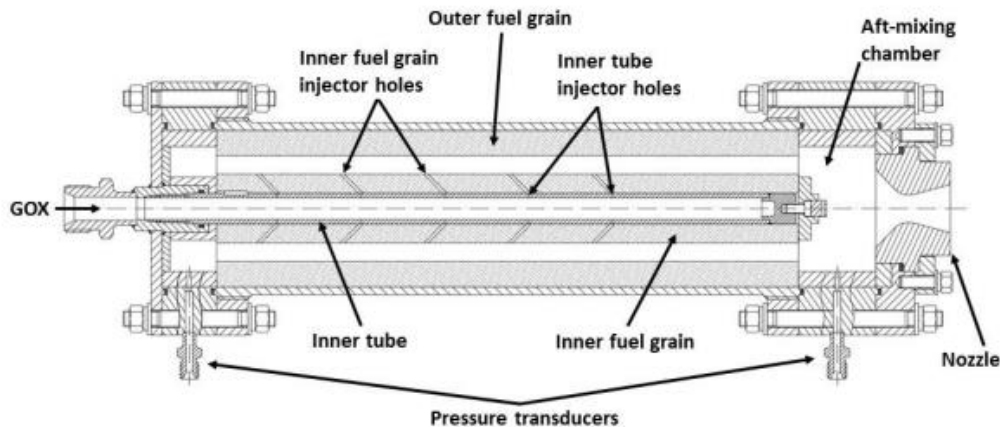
Double tube hybrid motor with internal distributed injection pattern. Image taken from Ref. [428].
